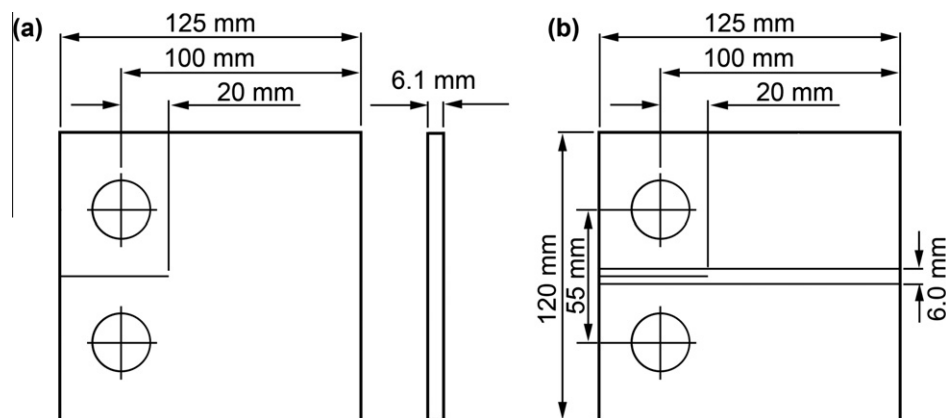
Geometry of C(T) 100 specimens used in this study: (a) base material and (b) laser welded specimen.
